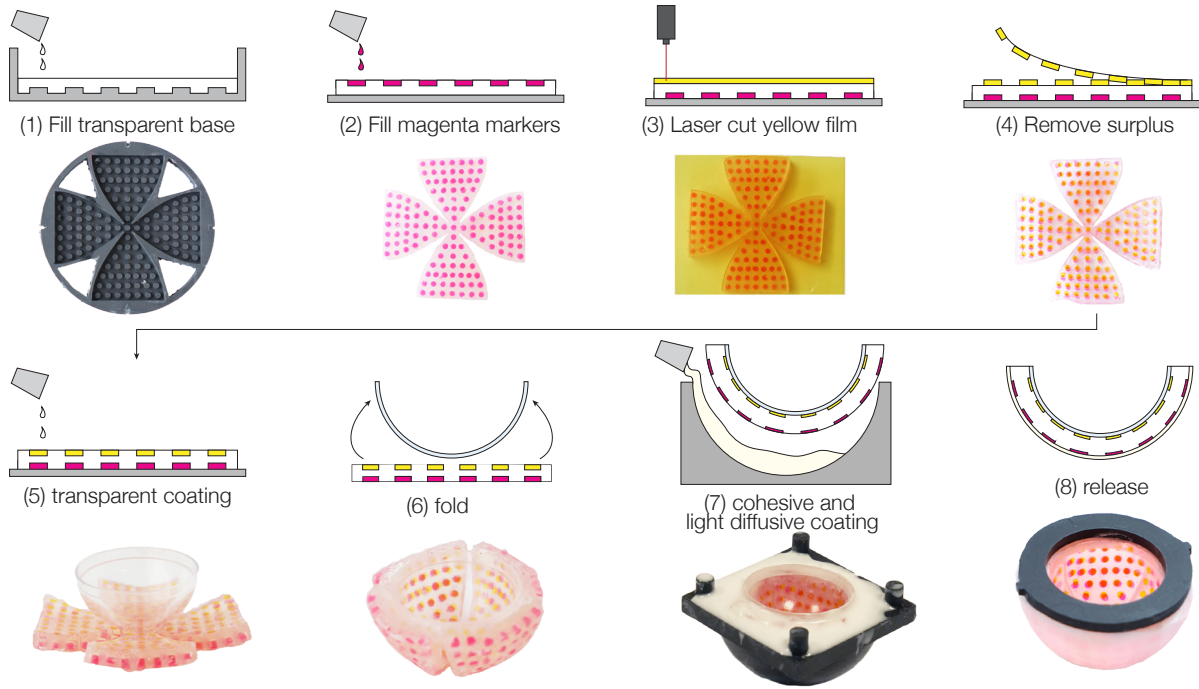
Manufacturing process. A flat mold makes alignment of the magenta and yellow marker easier. Once the flat pattern is completed, it is folded into a spherical shape, and held in place by curing additional elastomer, which acts as a diffuser for the illumination.
